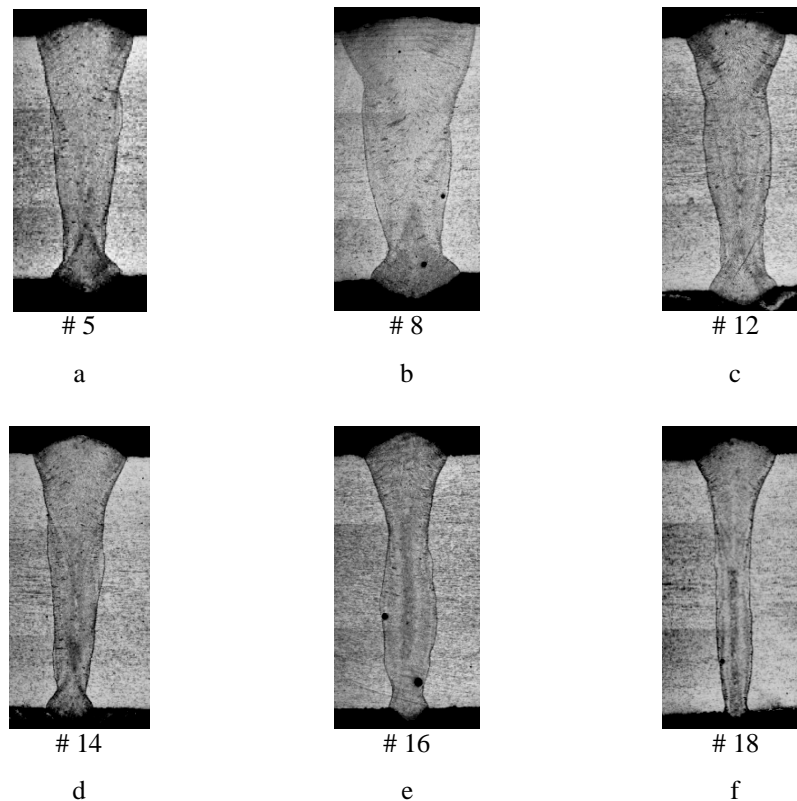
Laser-made welds of 1.4541 steel – parameters of welding in Table 2
